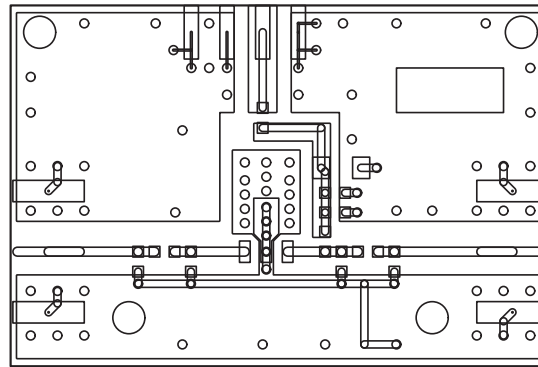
SKY65045 Evaluation Board Assembly Drawing
